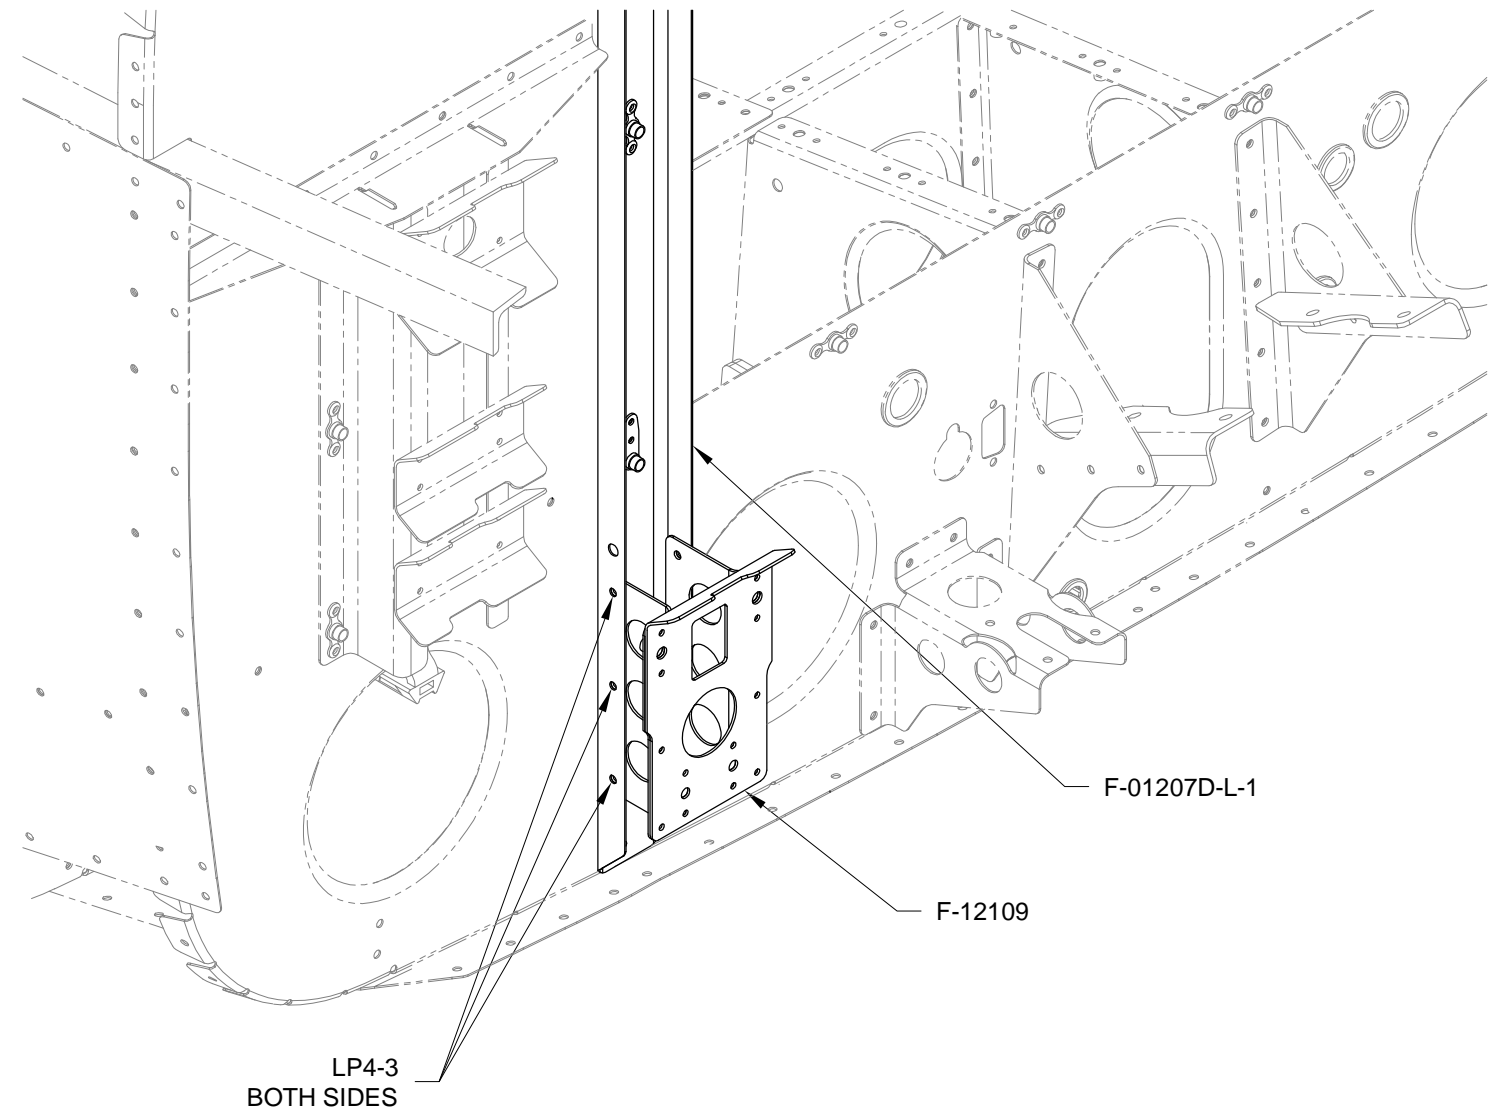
F-12109 ASSEMBLY INSTALLATION
